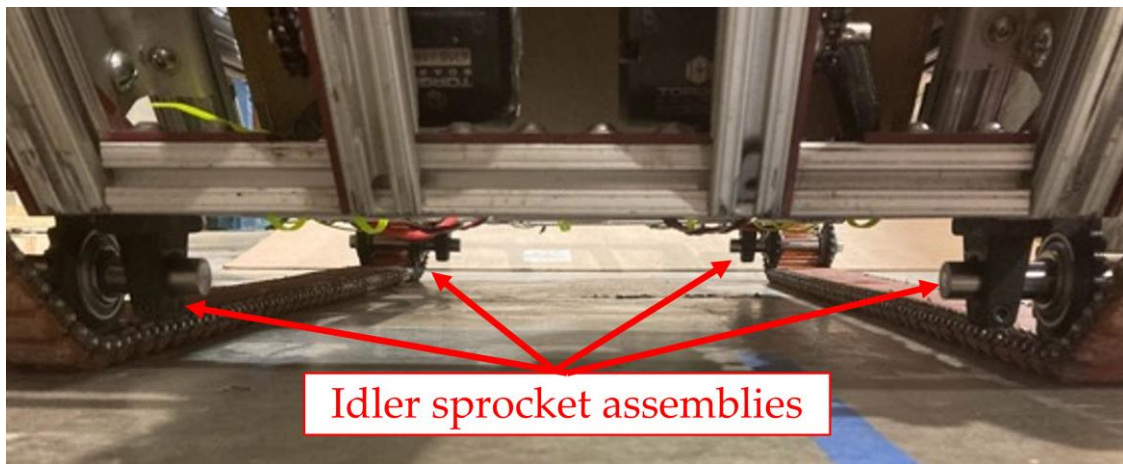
Finished installation of redesigned idler sprocket assemblies.
